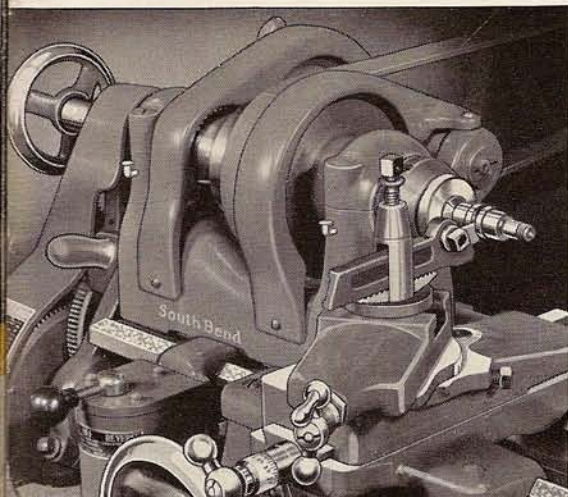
Machining Small Part Held in Hand Wheel Collet Chuck Attachment.
